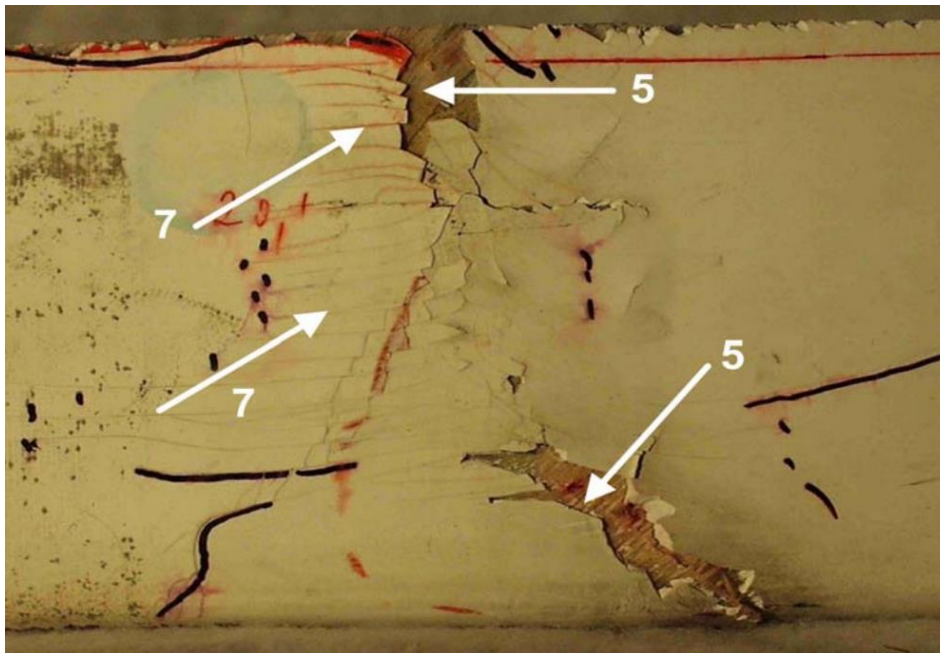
Type 7 & 5 rotor blade damage (Sørensen, et al., 2004)
